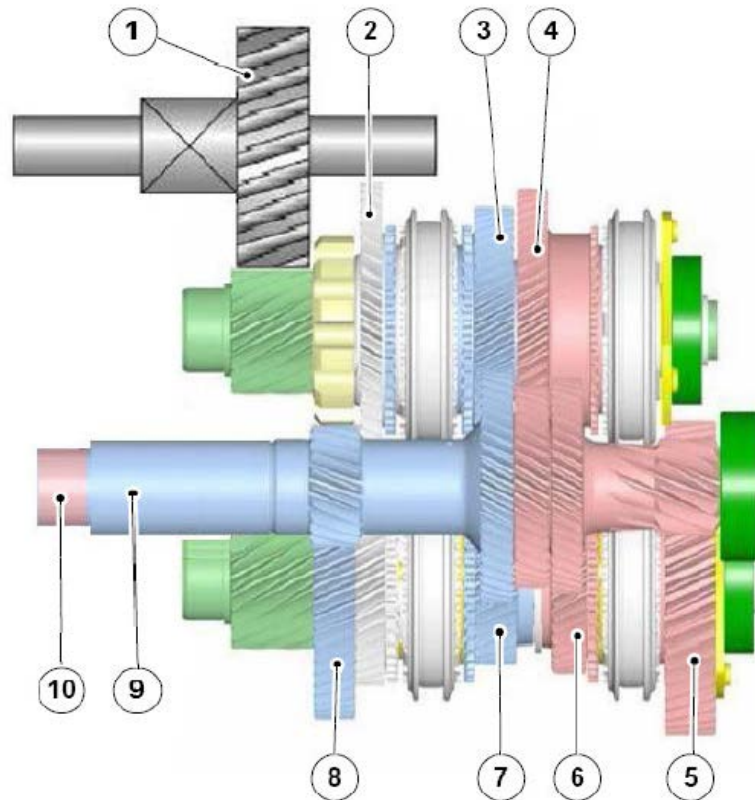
Mechanical layout of a 6 speed DCT (Ford-Werke GmbH).
